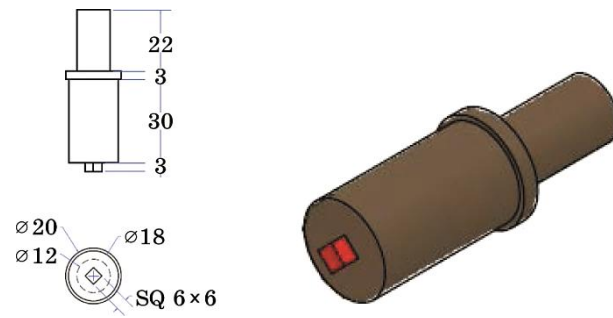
Geometry and dimensions (mm) of the FSP tool.
